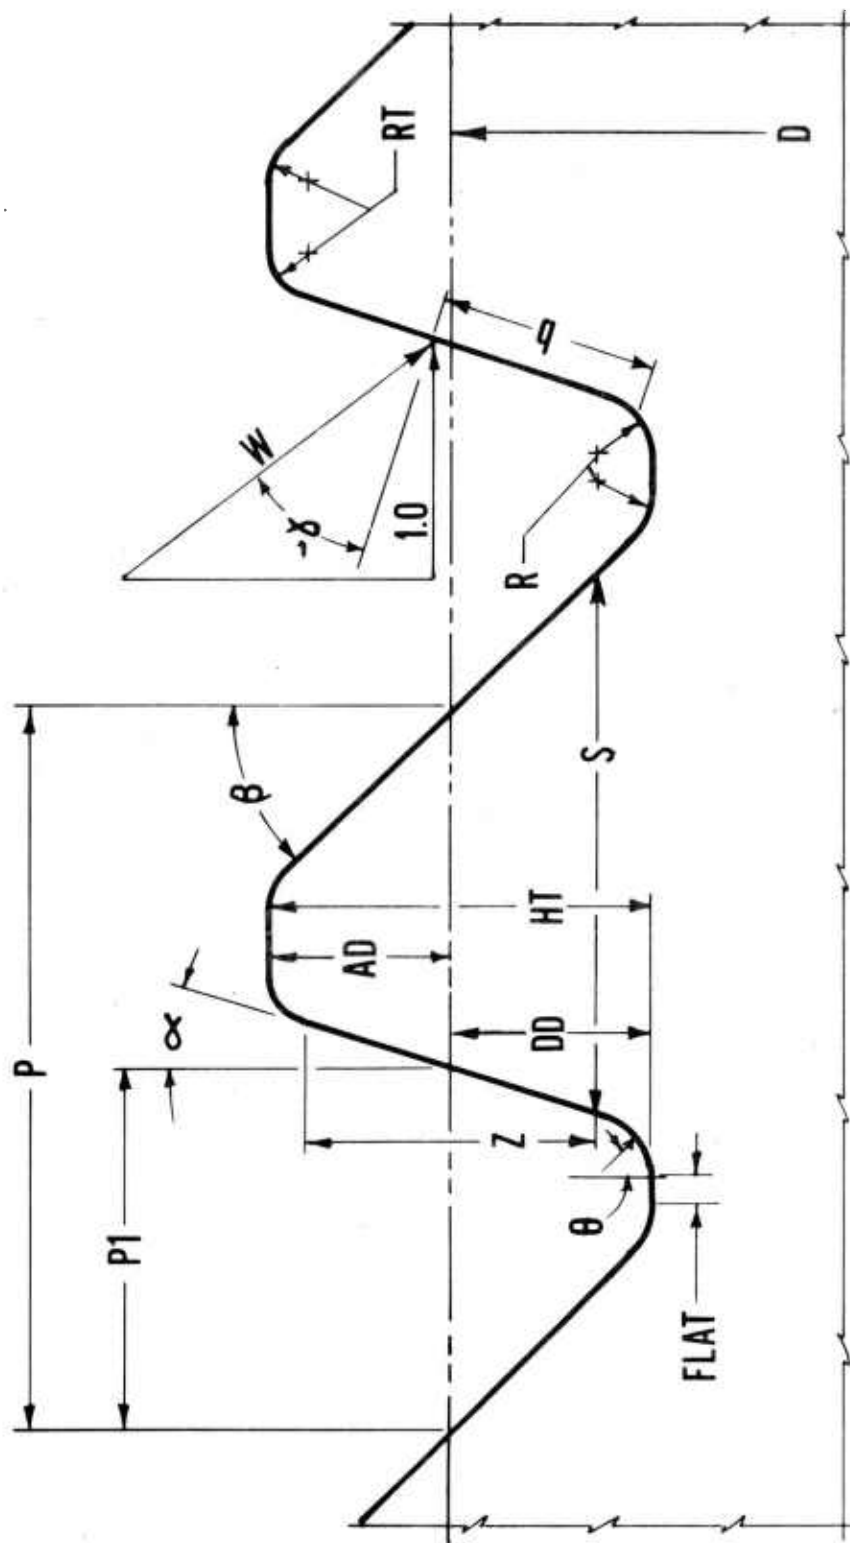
THREAD GEOMETRY AND LOAD PARAMETERS
